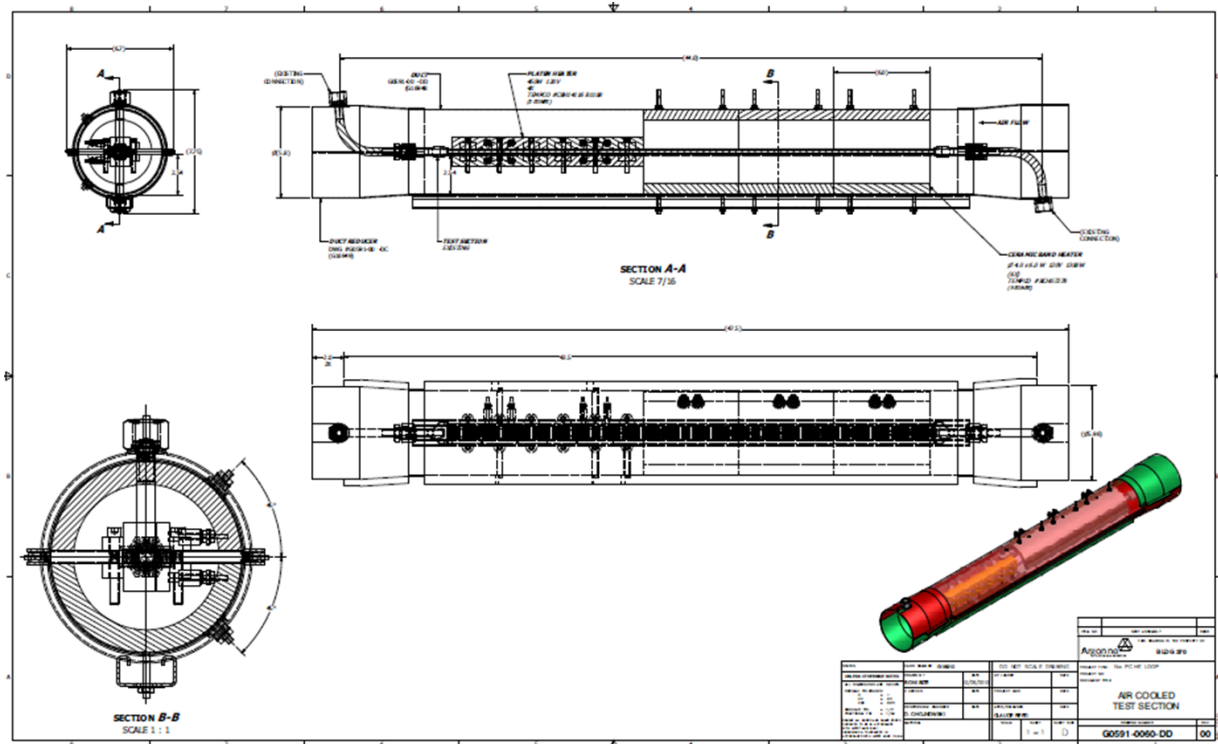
Stainless steel sodium plugging test section inside of steel cooling air duct.
